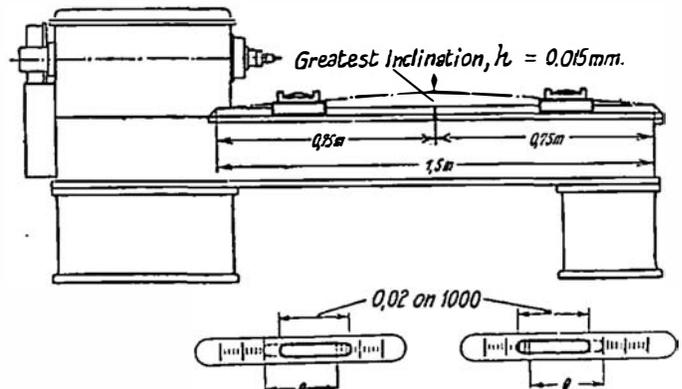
Unilateral Tolerances in Spirit-level Measurements
